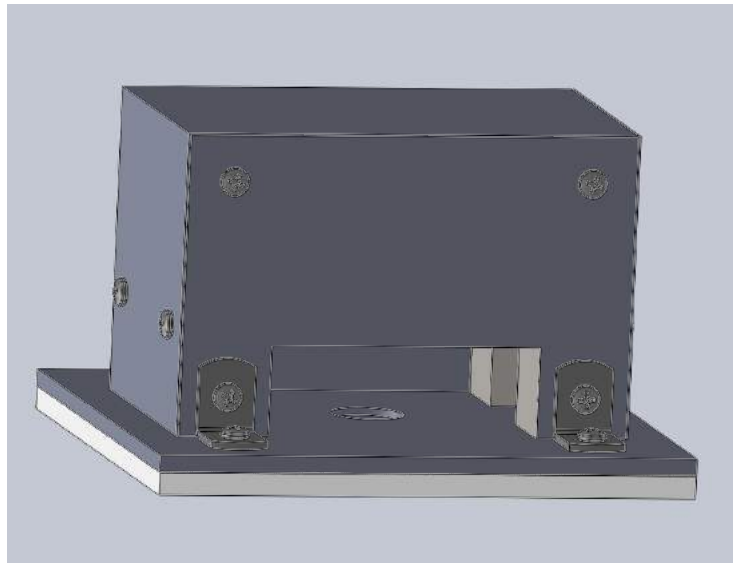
Slave Pulley Housing (Original design, current has no front panel, a door on the top, and a larger base plate to allow room for cinder blocks).
